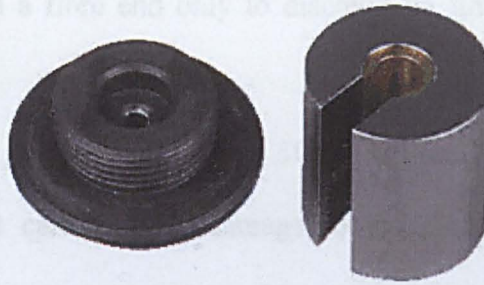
Polishing jig is spring loaded, POF is inserted into an SMA holder, which is held in place by the jig.
